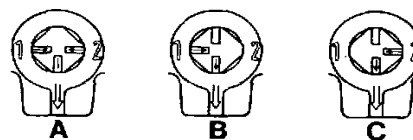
Positions for three-way cock, switch-over type fuel filters
